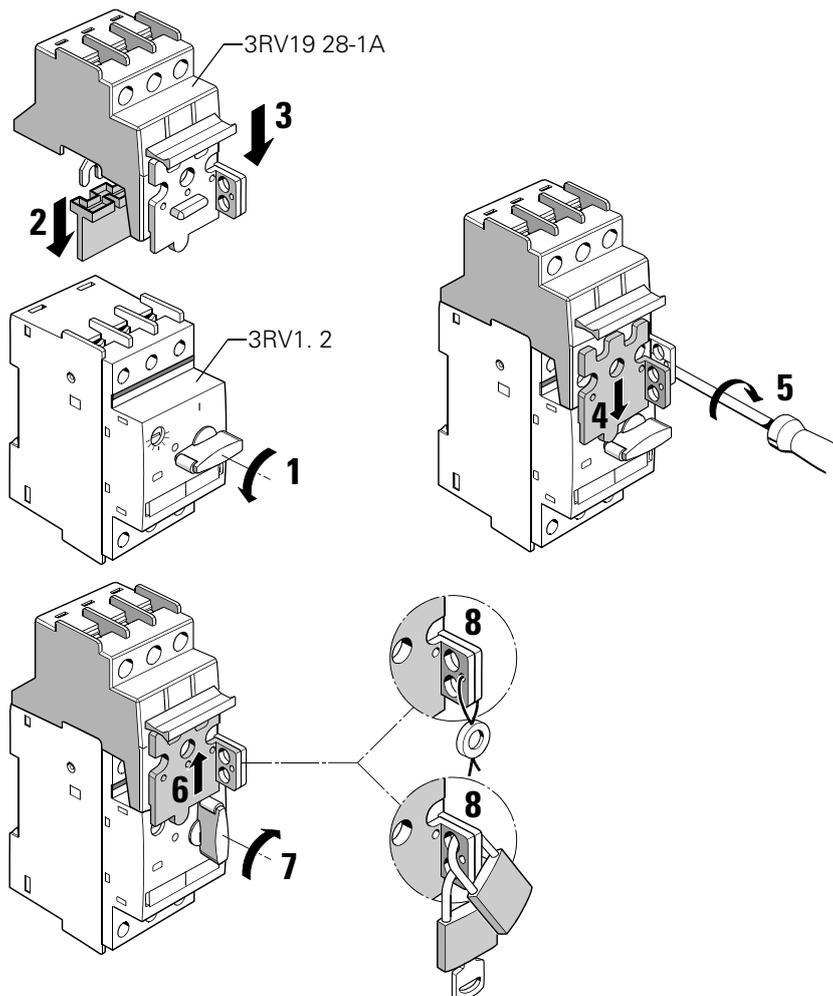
Mounting the disconnecting module (frame size S0)
